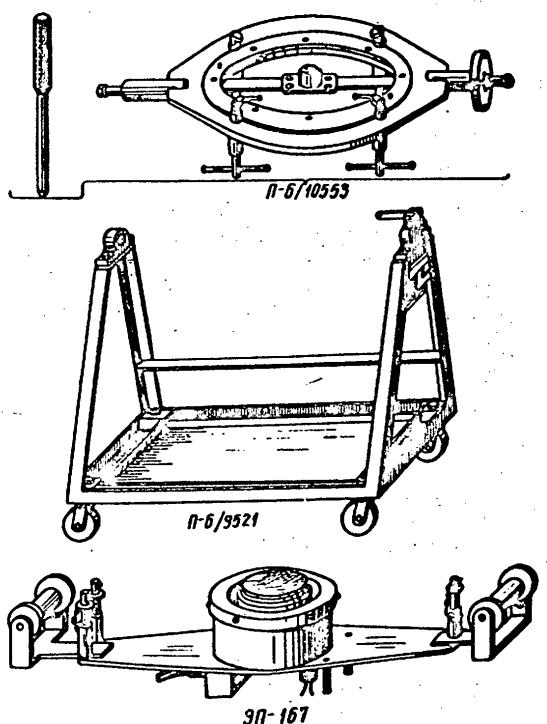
DEVICES FOR ASSEMBLY OF CRANKCASE NOSE-PIECE AND ENGAGEMENT CLUTCH
